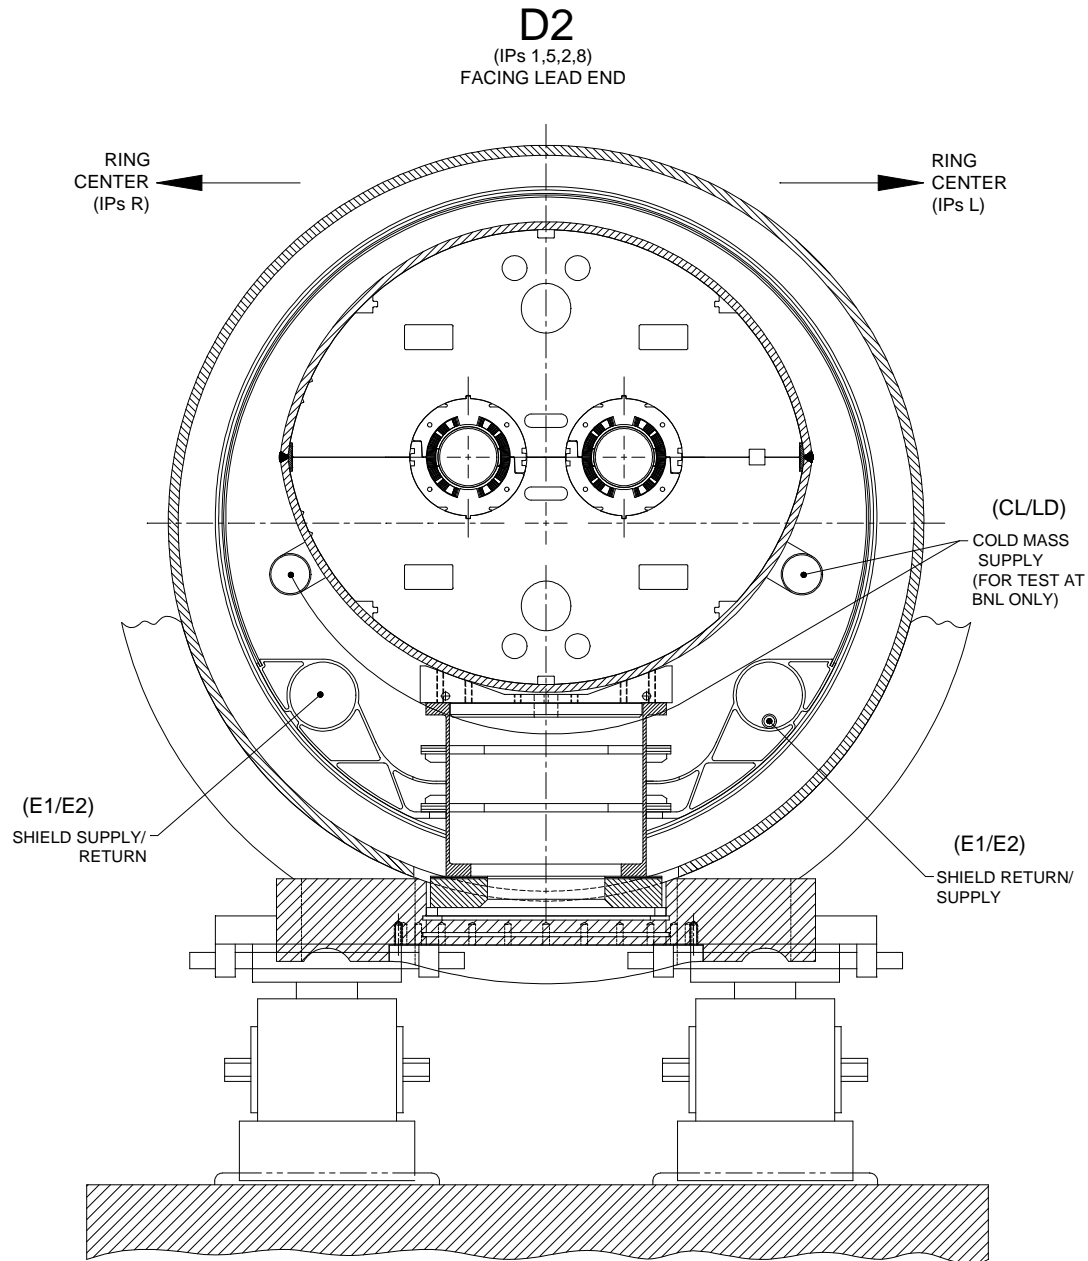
Sectional view of the LBRC (D2) cryo-assembly
